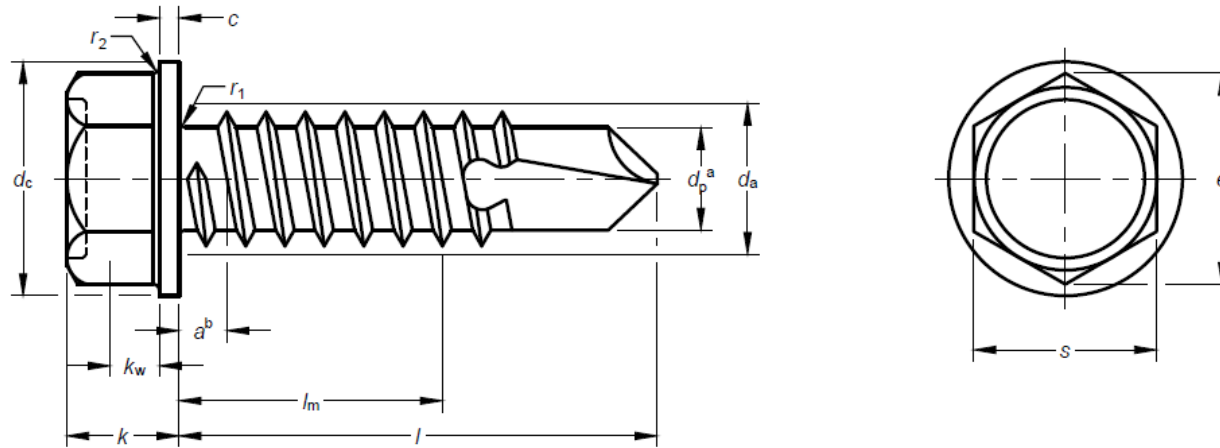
HEXAGON WASHER HEAD DRILLING SCREW
